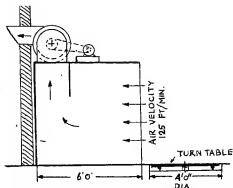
An exhausted booth for the control of dust generated when dressing castings (after Bolton and Ford, Reference 77).
